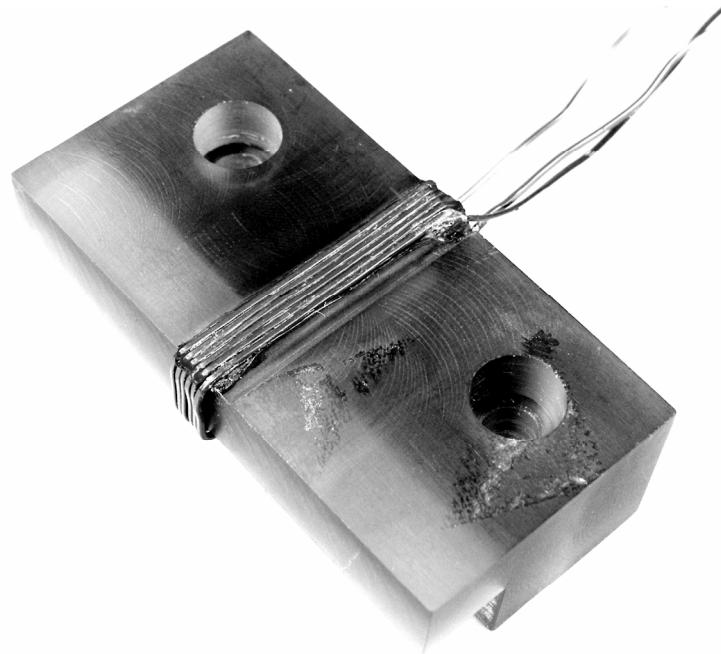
Axial Halbach magnetic bearing test model $r-z$ stator pole piece.
